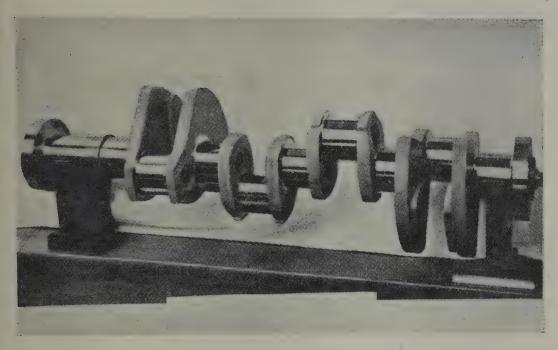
Four-throw diesel engine crankshaft, cast in s.g. iron (Courtesy: The Cooper Bessemer Corporation, U.S.A.)
